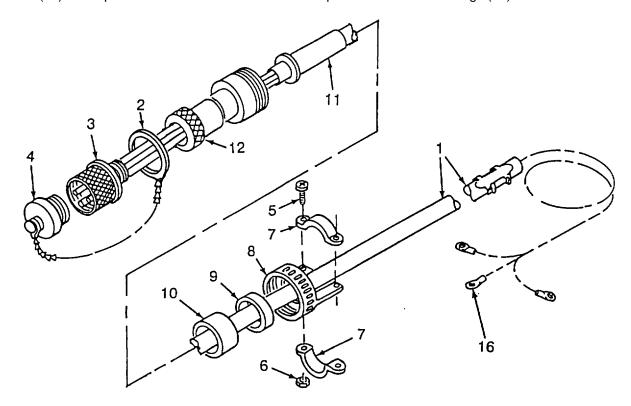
Power Cable Repair (Sheet 3of 3)
